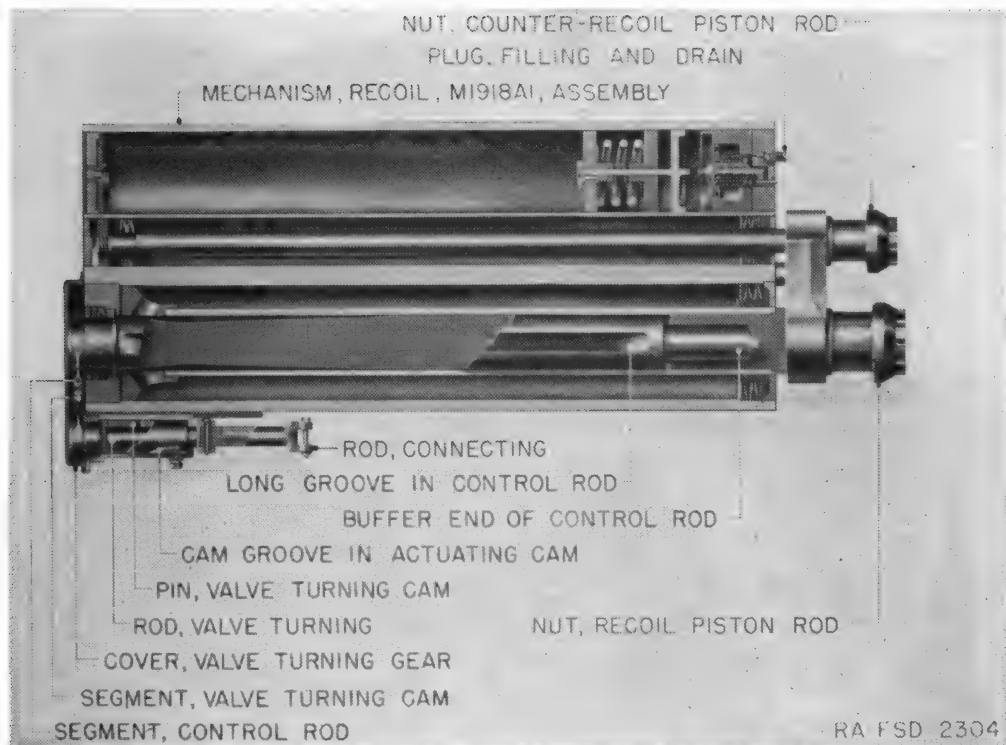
155-mm gun carriage M1918—diagrammatic sections of recoil mechanism.
